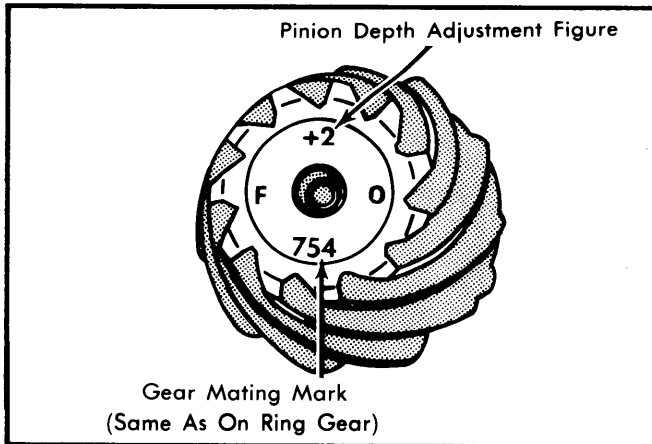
Pinion Gear Markings Showing Depth Adjustment Figure
